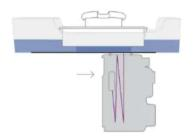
SLA Machine with Laser Mounted on Gantry [102]
